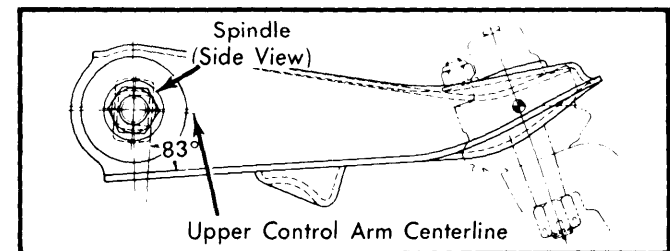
Side View of Upper Control Arm Showing Alignment of Spindle in Relation to Control Arm Centerline
